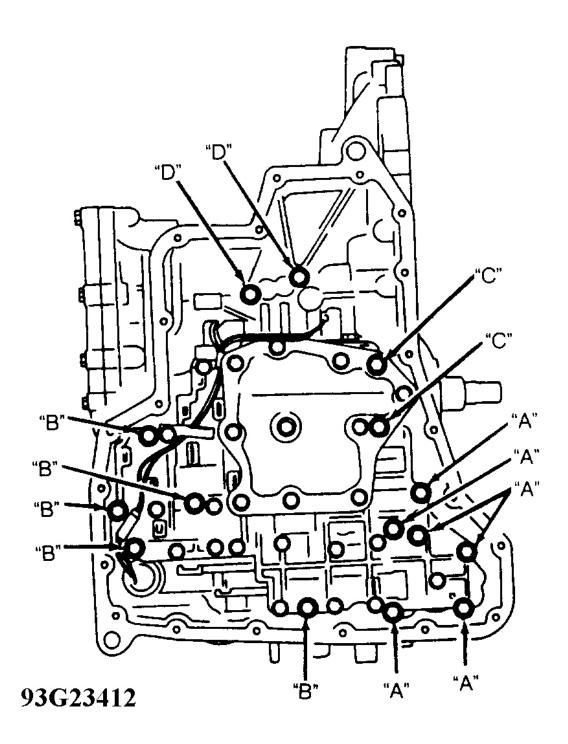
Identifying Control Valve Assembly Bolt Locations Courtesy of NISSAN MOTOR CO., U.S.A.
